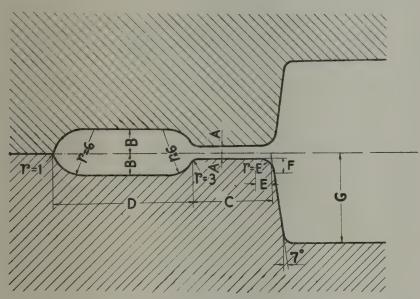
Standard dimension of the flash gutter (See also Table 5)
